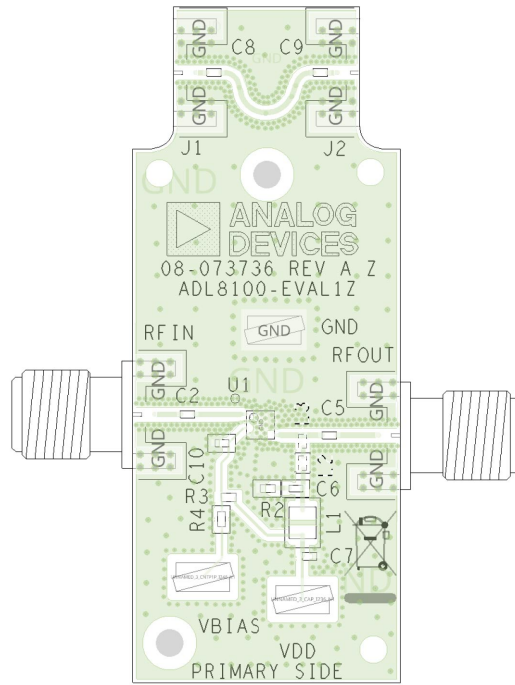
ADL8100ACPZN-EVAL1Z Assembly Drawing (J1 and J2 Not Installed)
